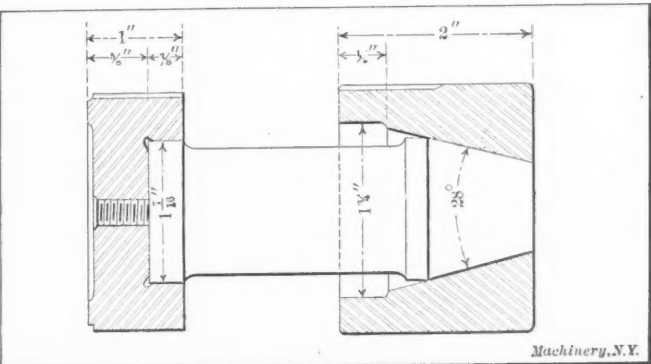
Adapter Bushings used in Holder shown in Fig. 2
